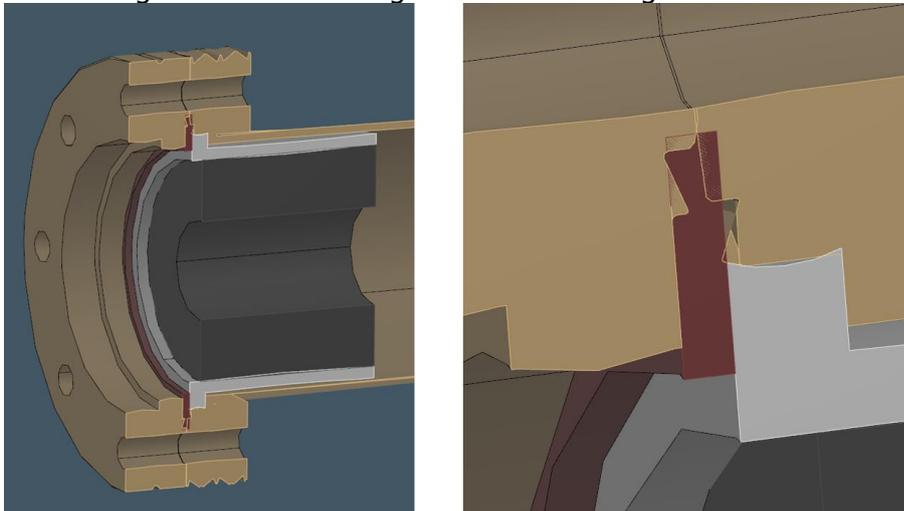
The support frames are clamped between the flange and the gasket of the Vacuum Tube
